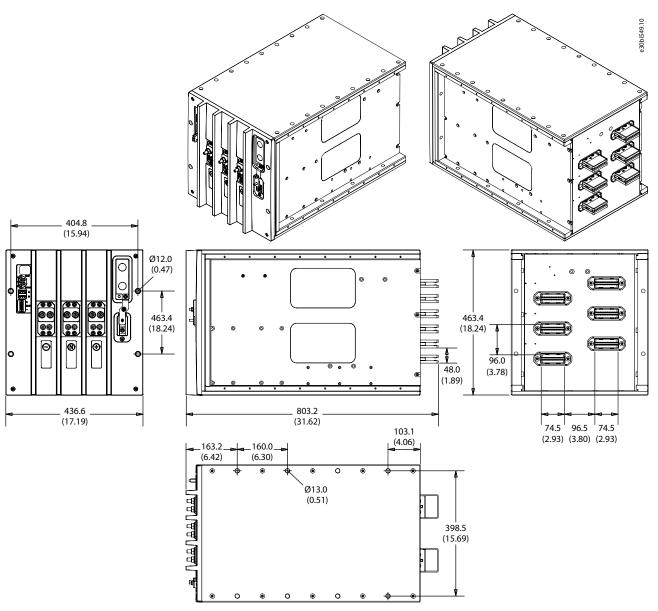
VACON® 3000 DFE power module dimensions in mm (in)
